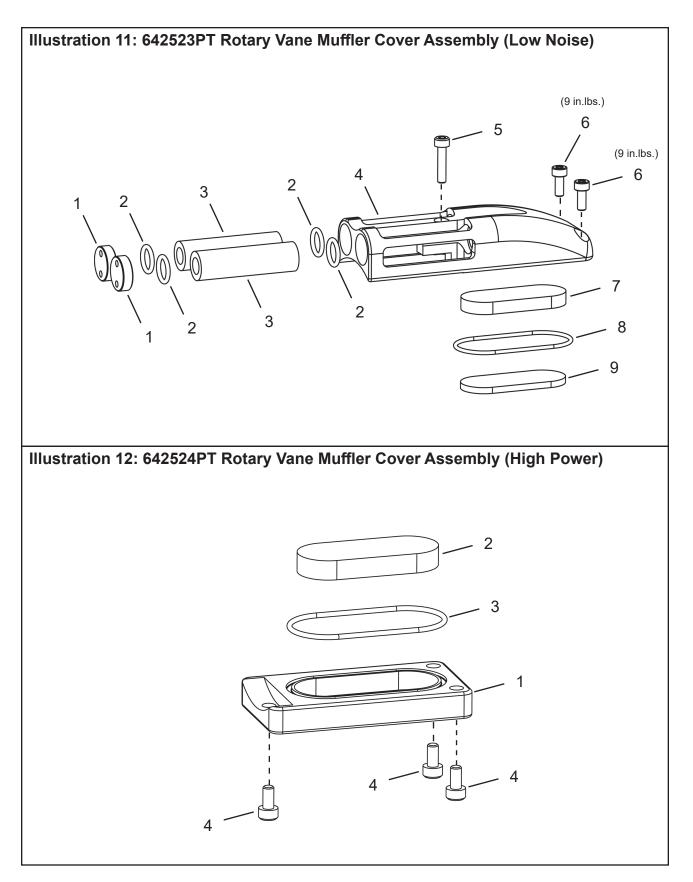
" - 642523PT Muffler Cover Assembly (Low Noise) - Vane Motor
